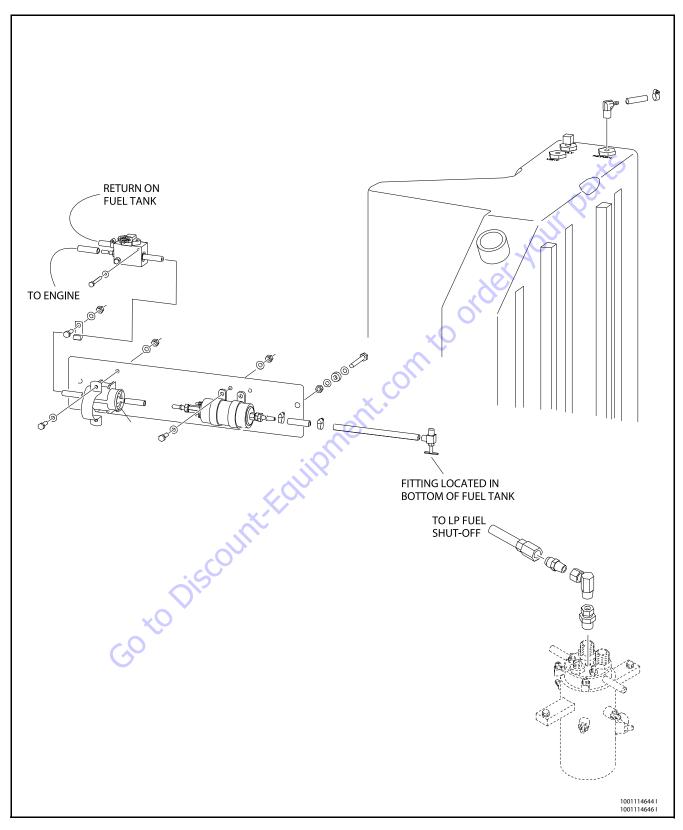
GM Engine with UGM - Sheet 2 of 3
